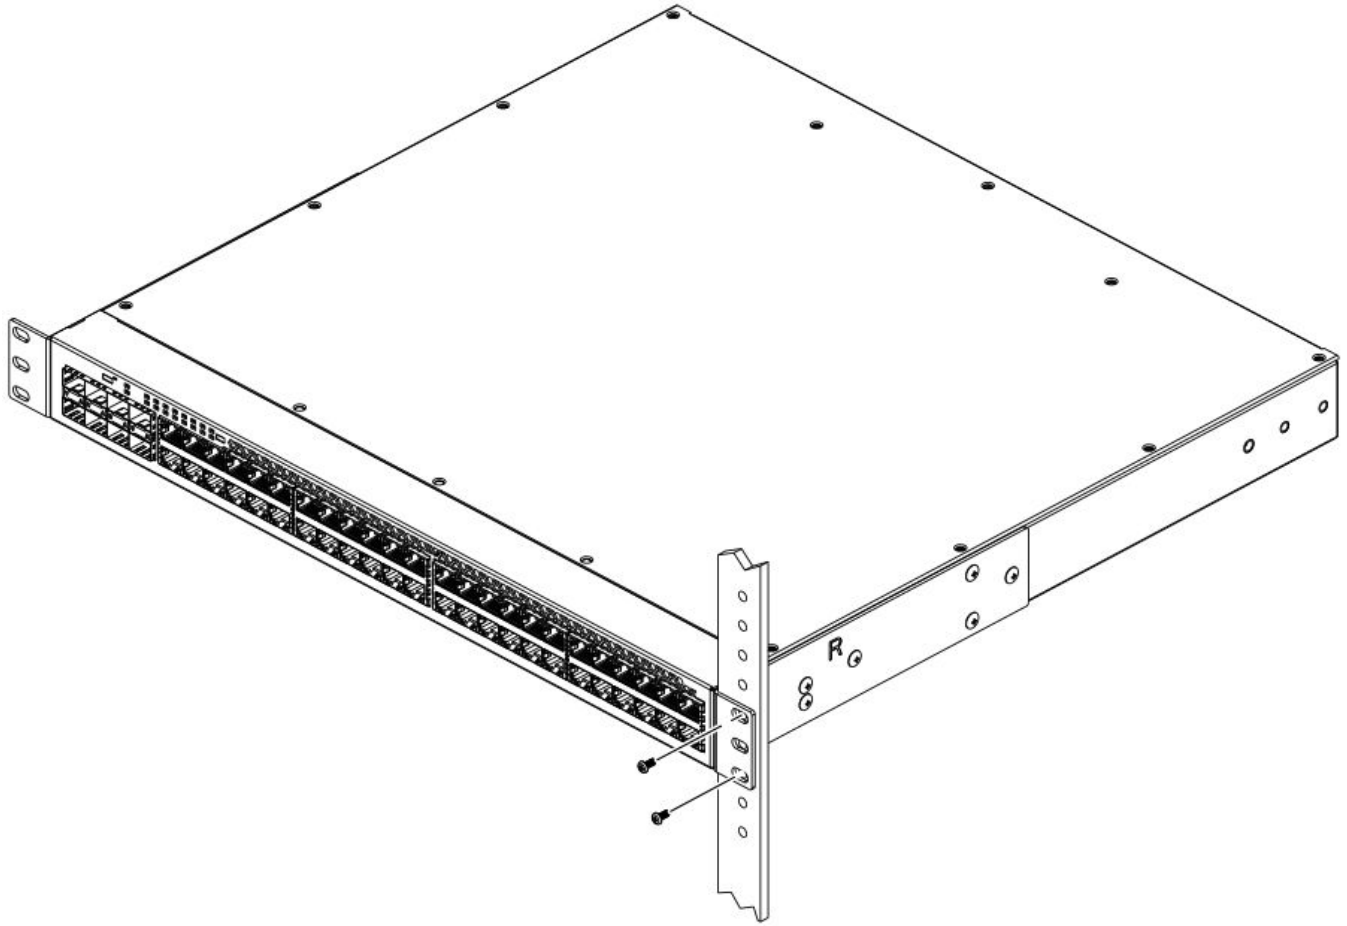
Attaching the mounting brackets for a Brocade ICX 6650
